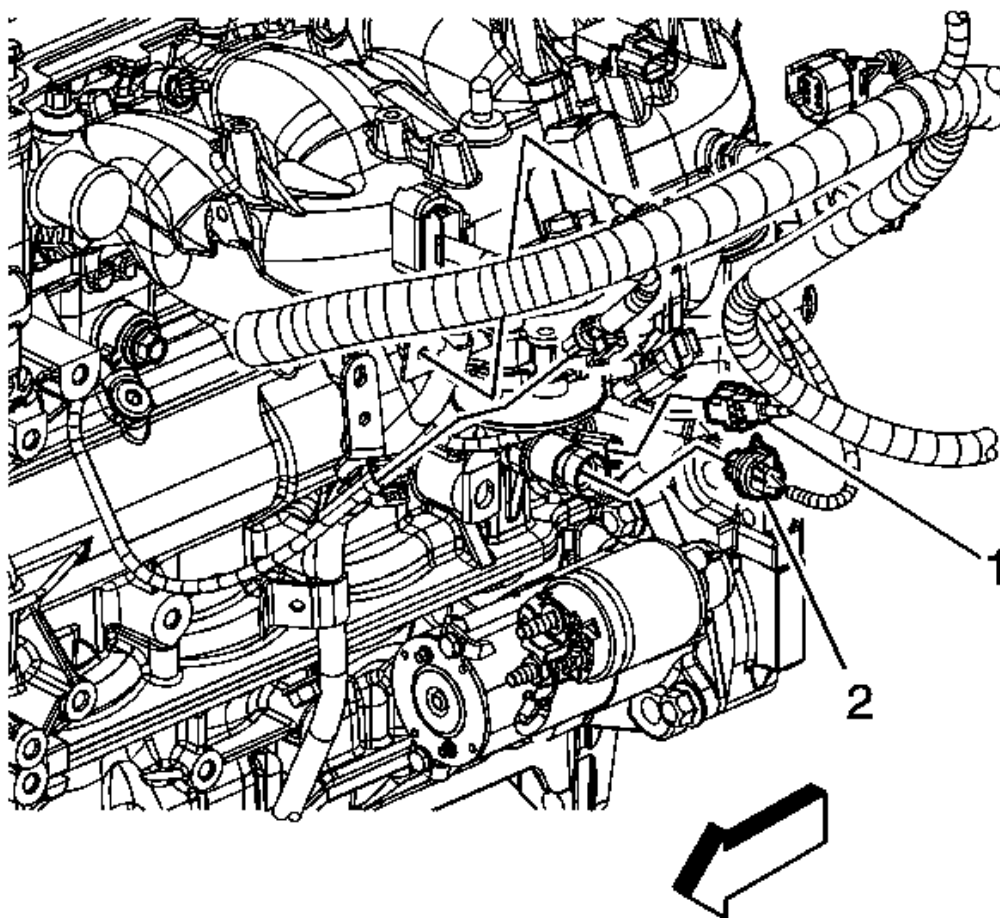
Identifying Engine Oil Pressure & Crankshaft Position Sensor Electrical Connectors
